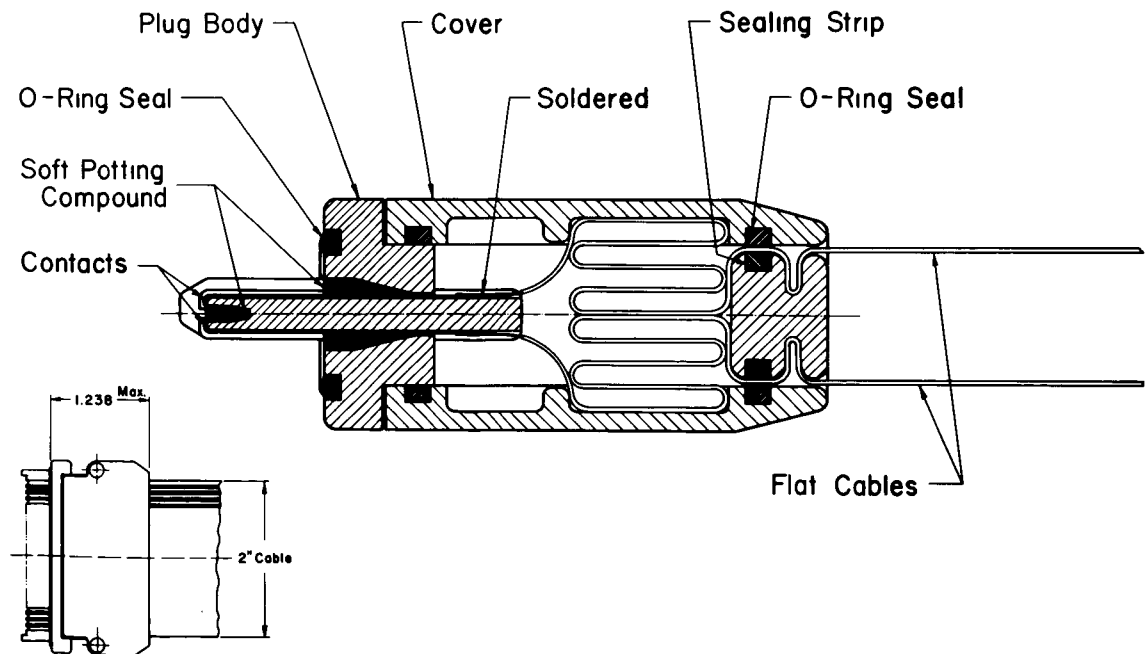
PREMOLDED CONDUCTOR CHANGE PLUG
